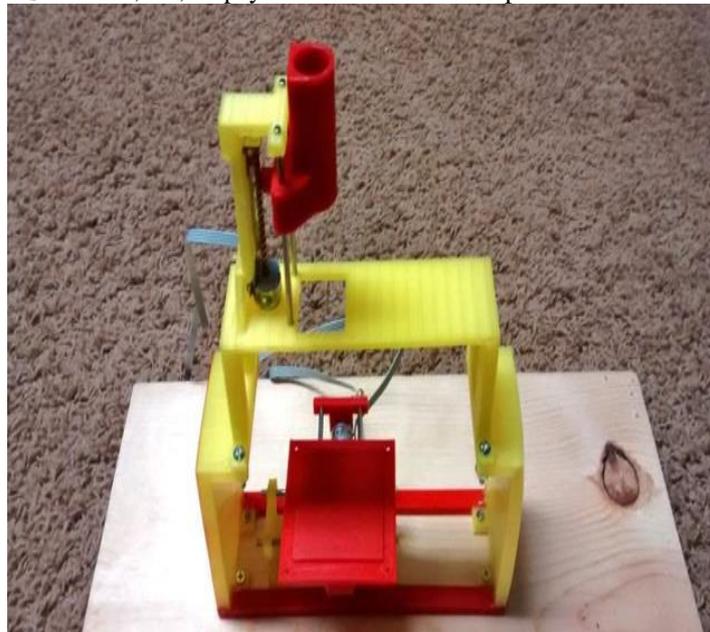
Upcycle DVD drive casted using 3D printer. It consists of certain mechanical parts to be casted using the technology; the commands are available on the web. These parts are then assembled to get appropriate Upcycle DVD drive which would be cost and space effective.
